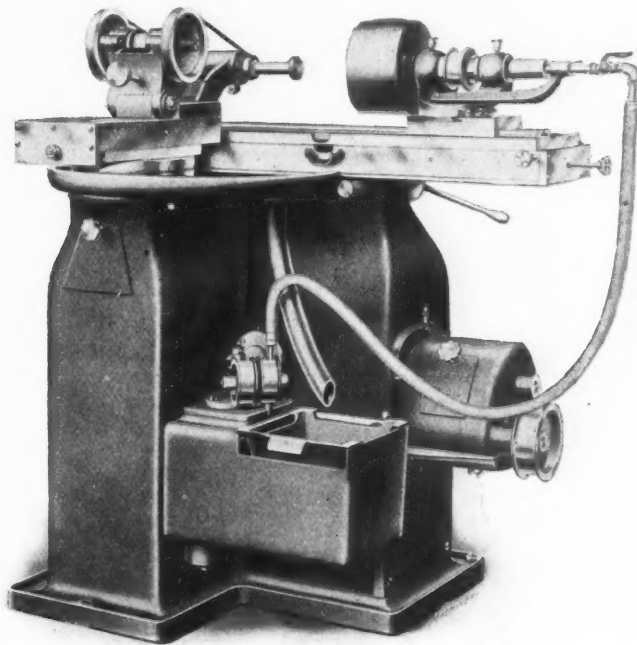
Rear View of Machine showing Cross-slide, Pump and Water Tank
